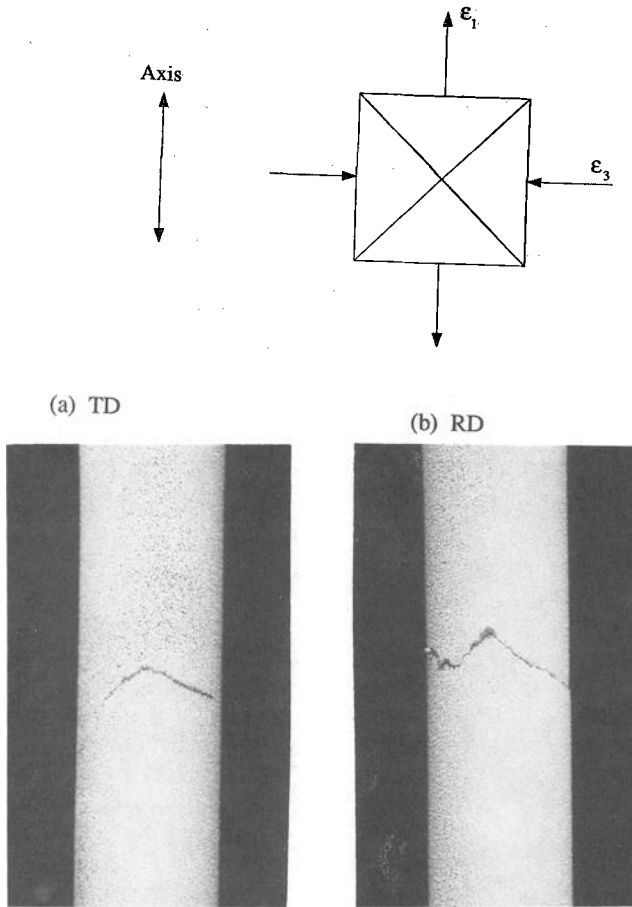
Photographs showing cracks, their orientations, and the planes of maximum shear on the specimen surface under tension/compression: (a) a TD specimen, and (b) an RD specimen.
